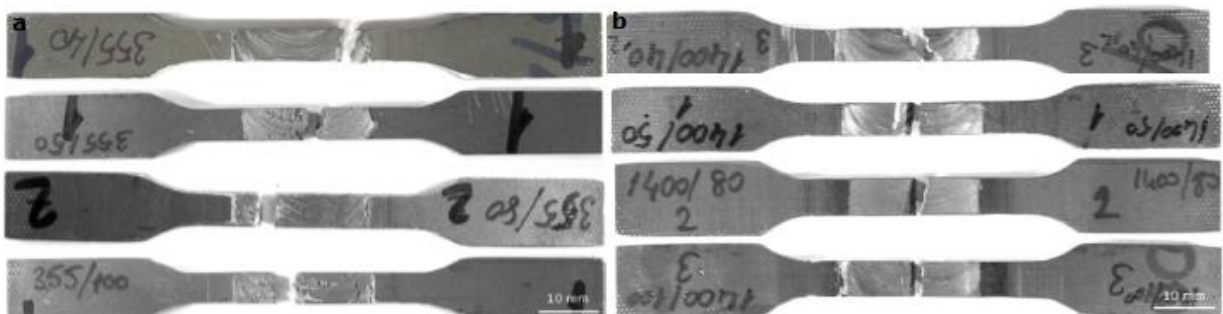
Cracked surface appearance of FSW after tensile test a) 355/40-100 b)1400/40-100
